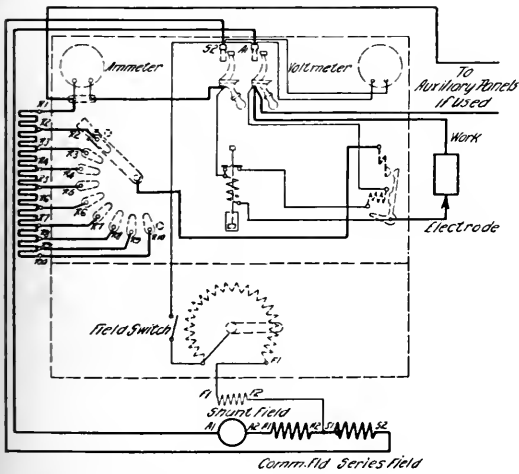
Connections of Arc Welding Control Panel for Controlling Generator and One Welding Circuit
